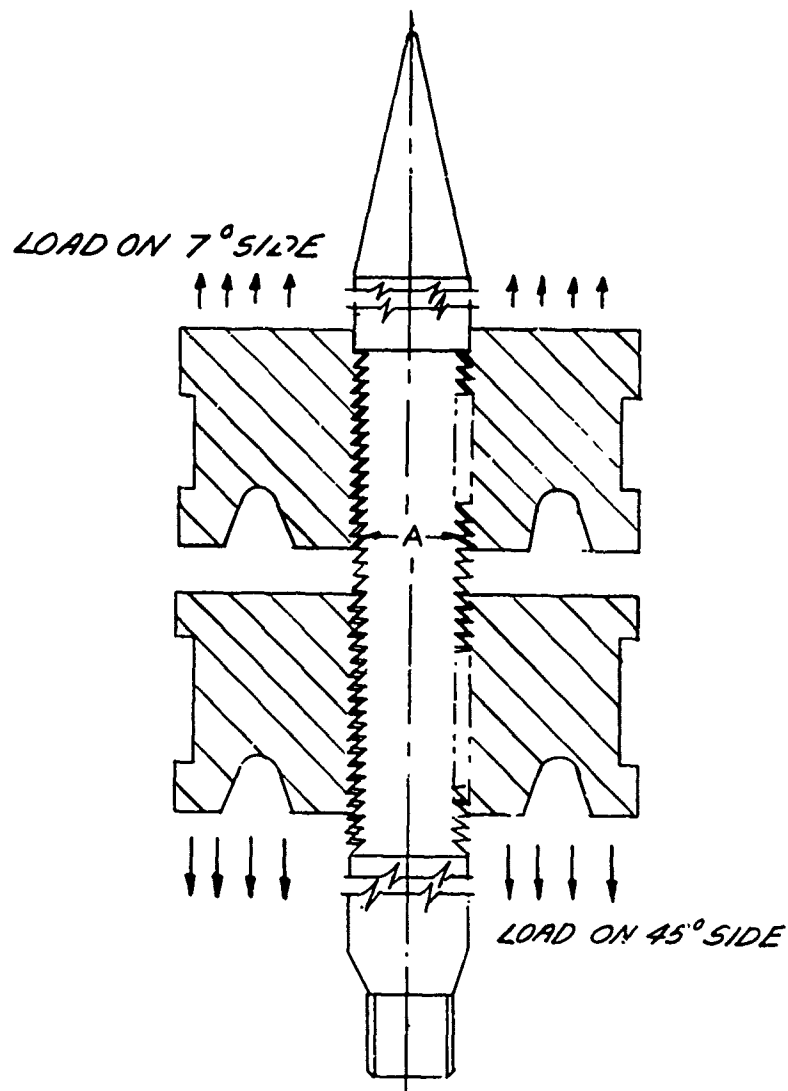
Sketch of Tensile Loading of Complete Penetrator Using Segments of Sabots
